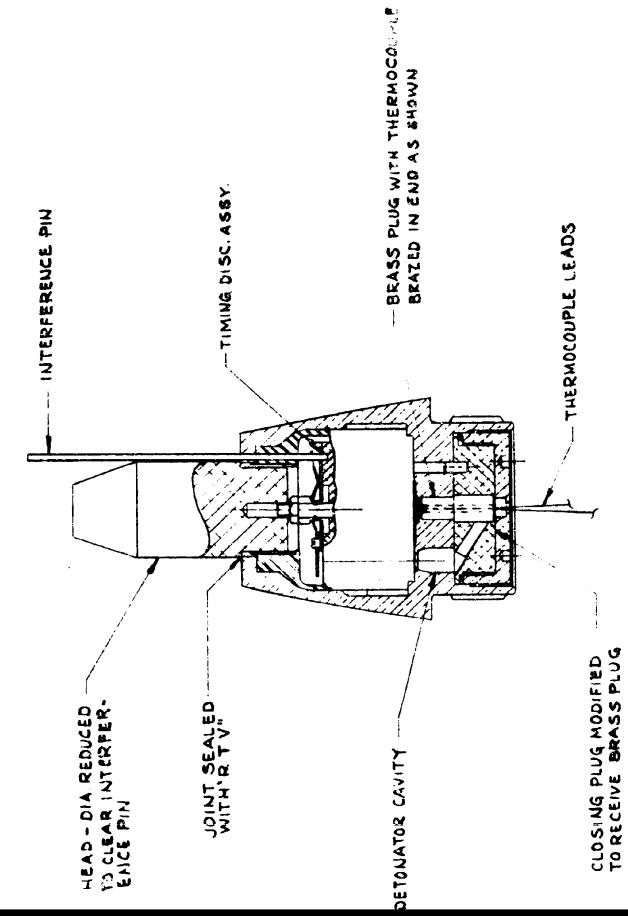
shows the detonator holding and actuating fixture used to test detonator and detonator-lead combination.
